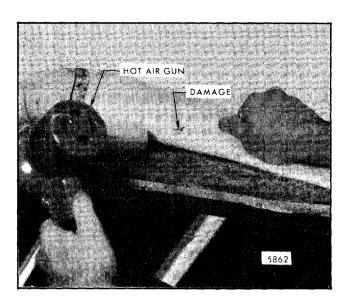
Separating Roof Cover from Foam Pad - Heat Application
